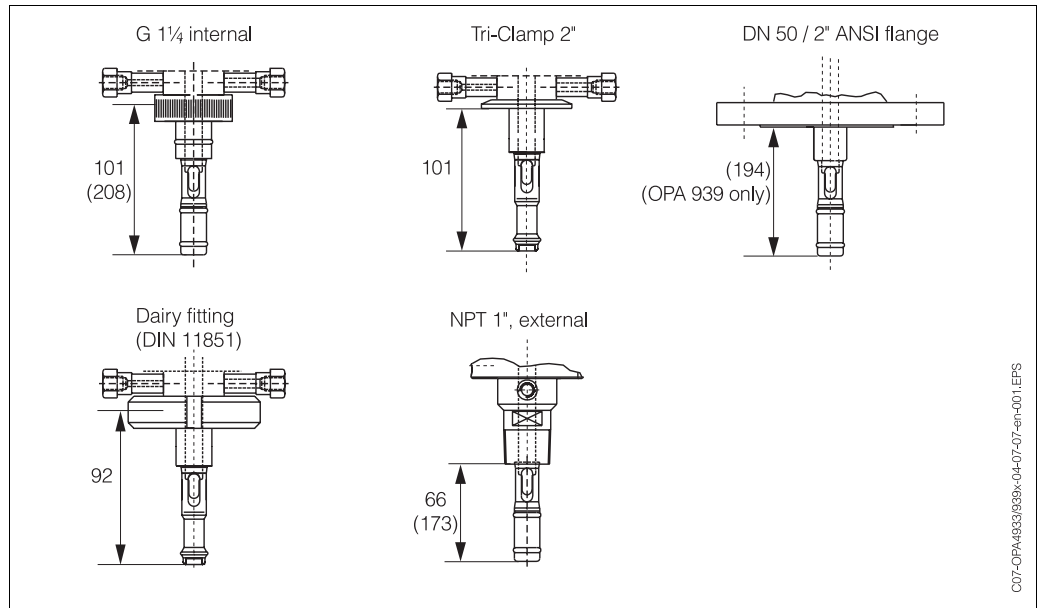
Existing process connections for the CleanStar OPA 933/939 assembly
